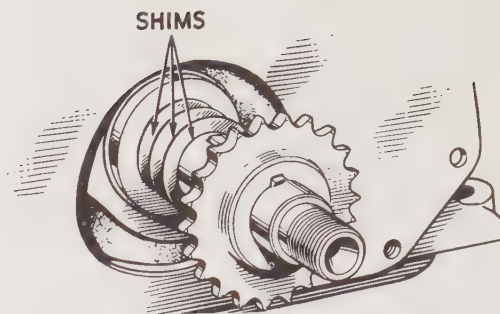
38 Shim adjustment for crankshaft sprocket, to ensure correct chain alignment.
